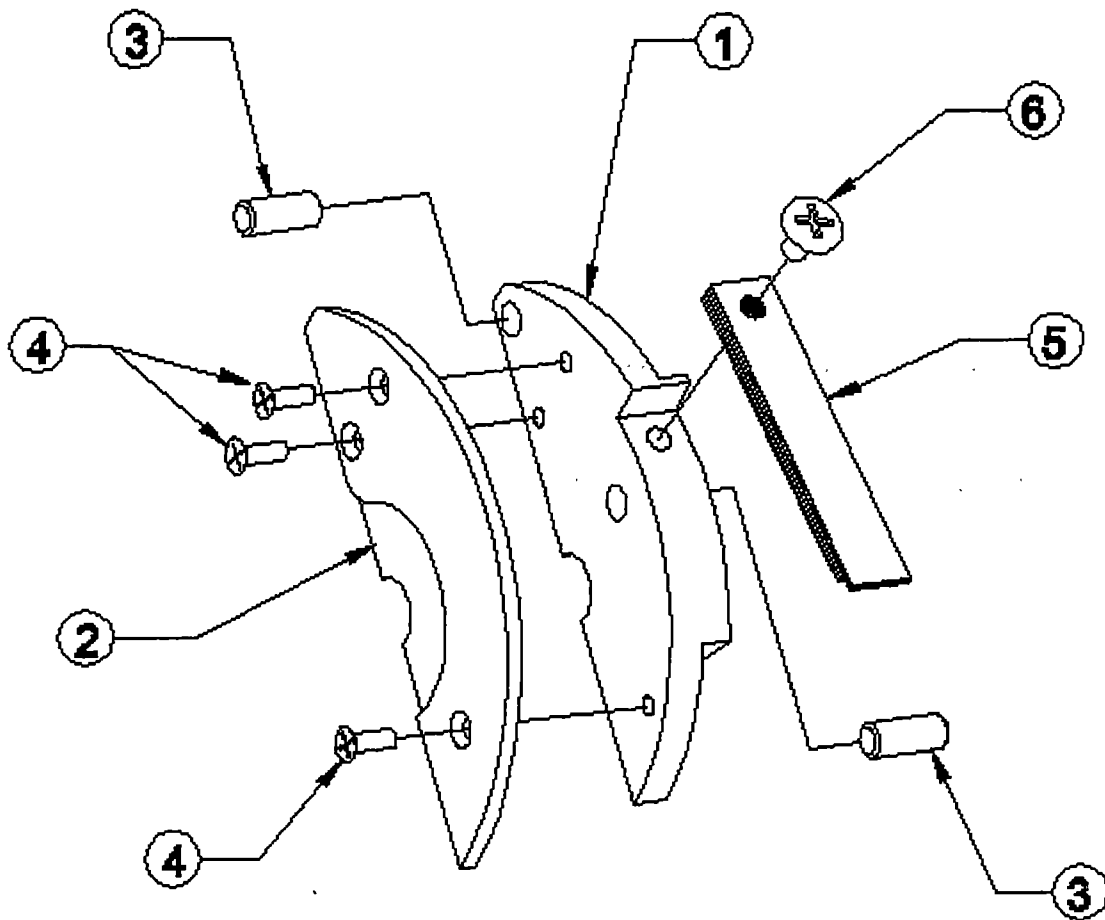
Exploded Assembly View of the Centrifugal Weight
